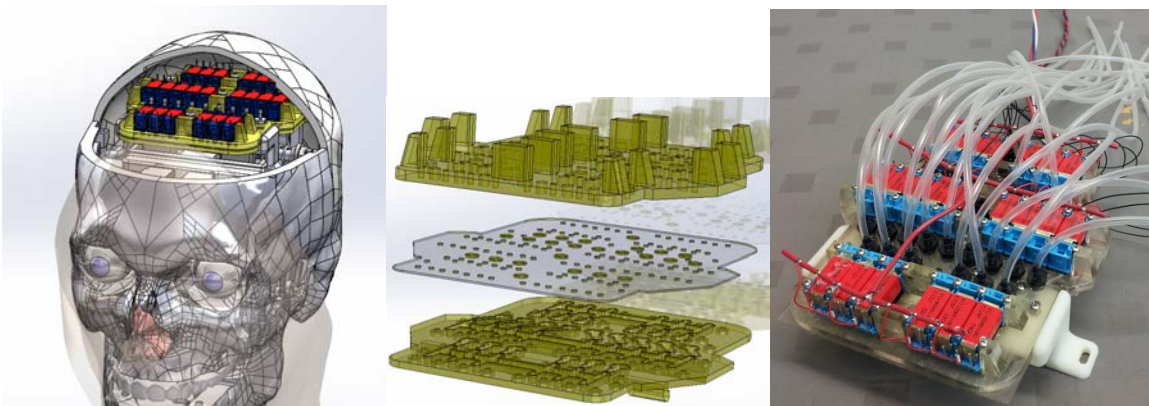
(Left) models of the manifold assembly in place on the head, (middle) two part manifold with gasket structure, and (right) assembled valve array, awaiting installation in the head.
